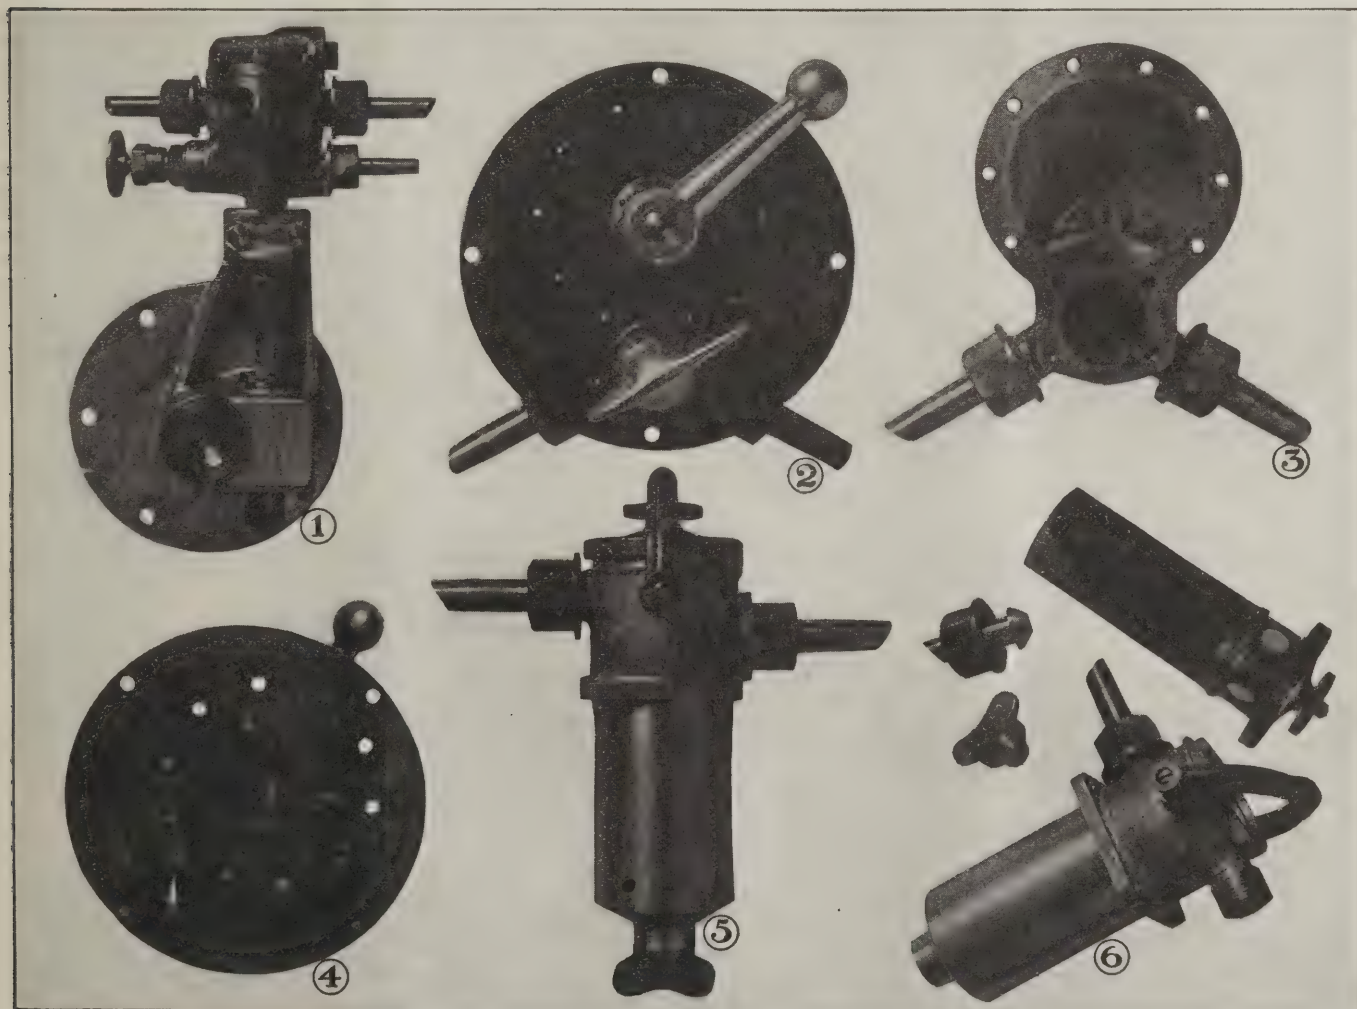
Power Pump with drive and support for Liberty Engine. Fig. 2—Front of Hand Pump. Fig. 3—Exterior of hand pump showing inlet valves. Fig. 4—Cover and motor of hand pump. Fig. 5—Exterior of strainer. Fig. 6—Parts of strainer
